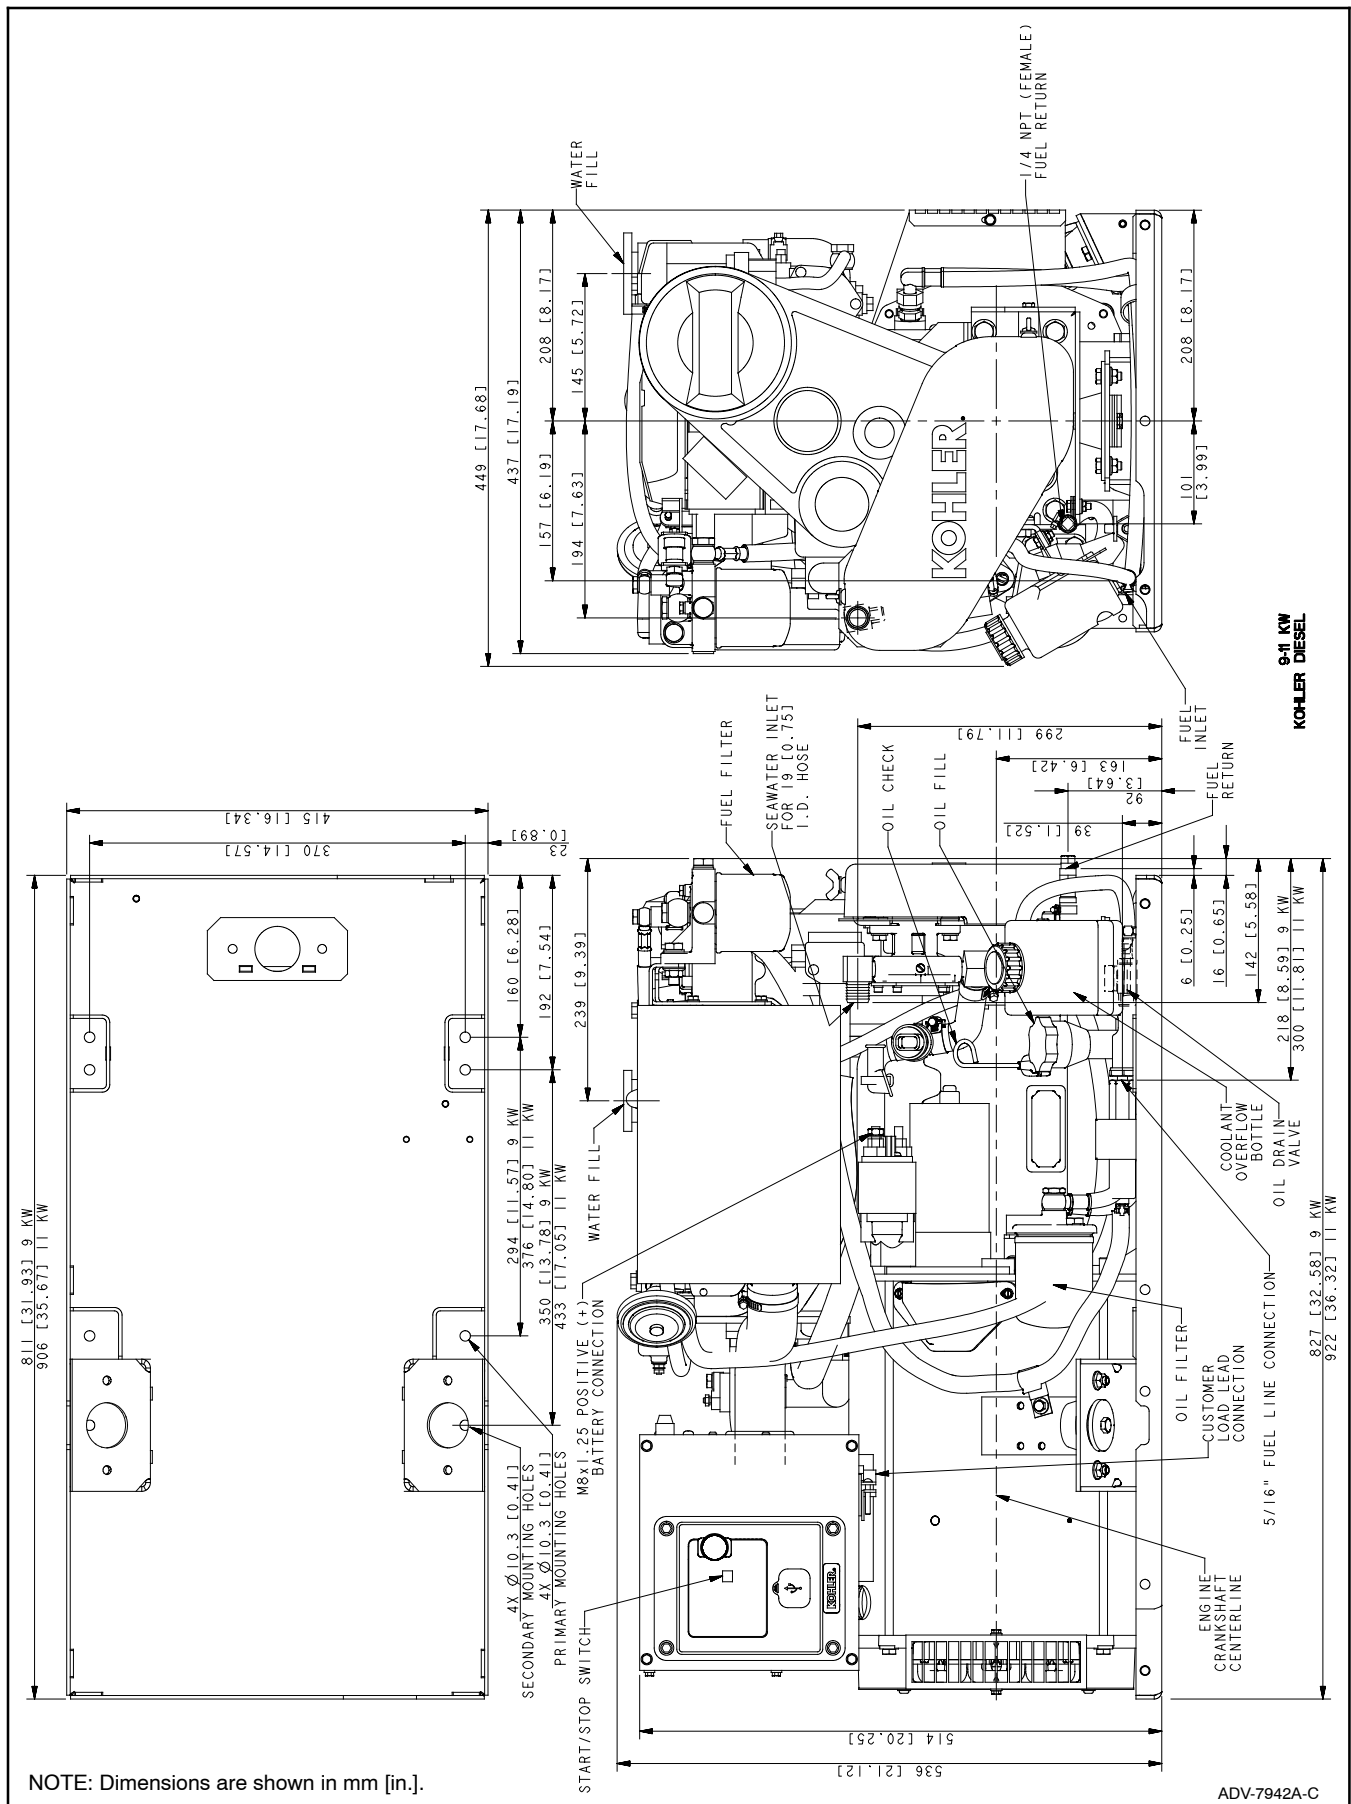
Dimension Drawing, 9-11EKOZD and 7-9EFKOZD (Sheet 1 of 2)
